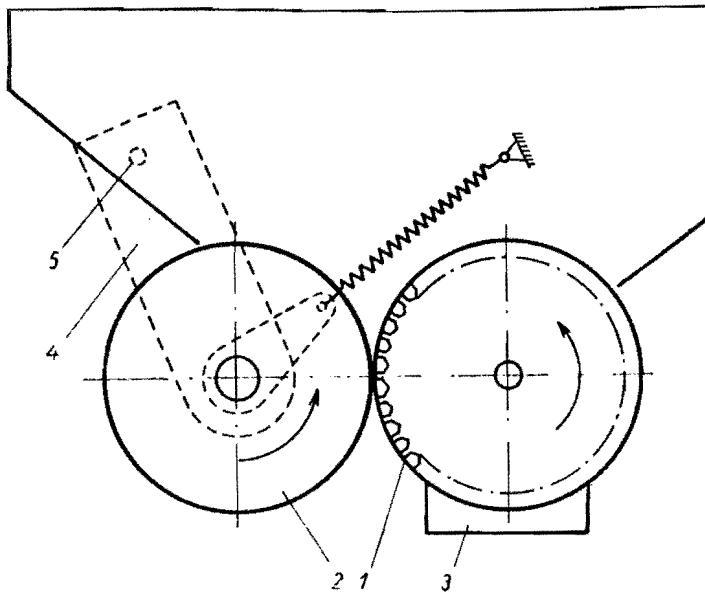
Example of the application of a thrust roller pressed against the rotor (after Massey-Ferguson): 1 — rotor; 2 — pressing roller; 3 — ejector; 4 — arm; 5 — axis of arm rotation.
